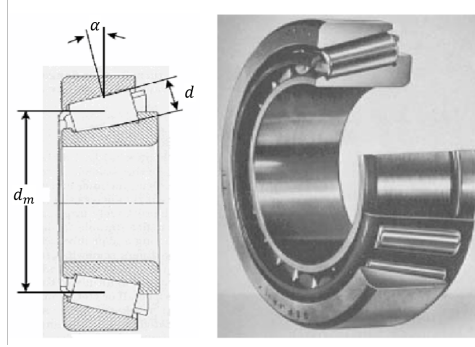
Tapered Roller Bearing Structure and Photo[4]
